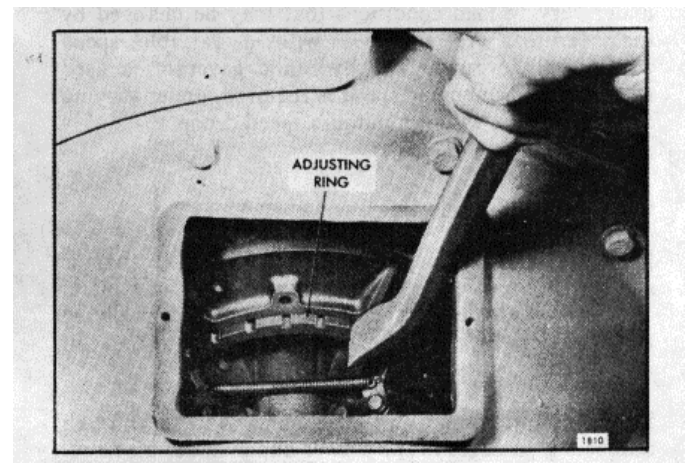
Power Take-Off Showing Typical 11-1/2" Diameter Clutch Adjustment Ring
